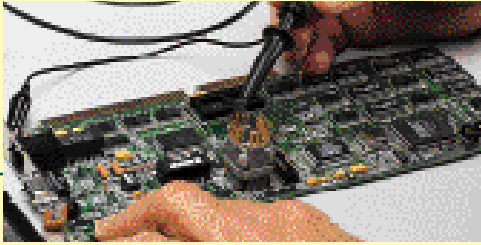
New 32-, 40- & 44-pin SOIC/SOJ test clip is a new design of the spring-loaded clip that features double-row .025" wire wrap pins for easy connection to ribbon cable. This clip will fit all SOIC/SOJ chips between .300" and .600" in width.
